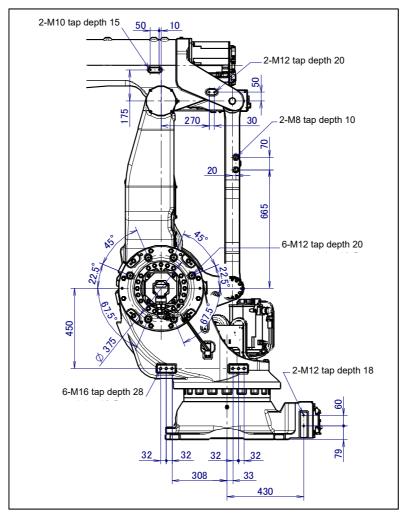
(f) Equipment mounting faces (M-900*i*B/280 (2/2))
